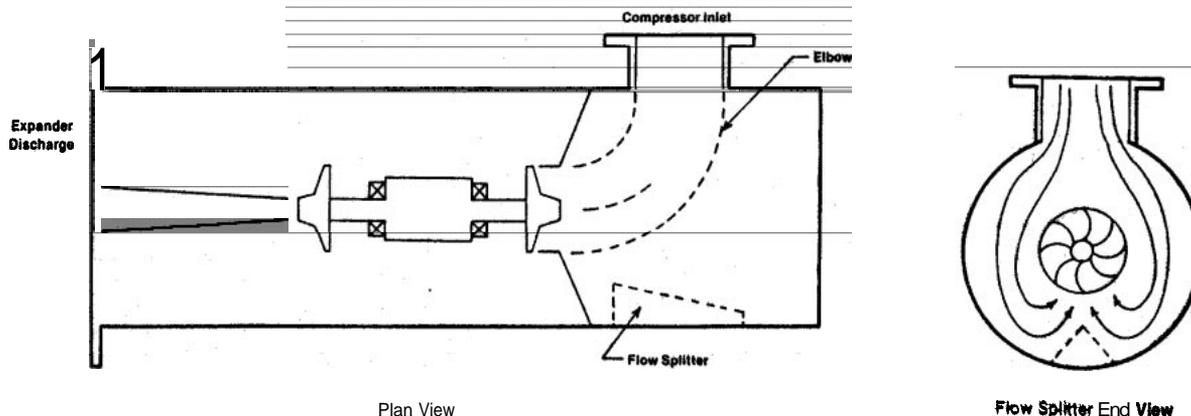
Cutaway of Turboexpander/Compressor Illustrating Inlet Modifications.
